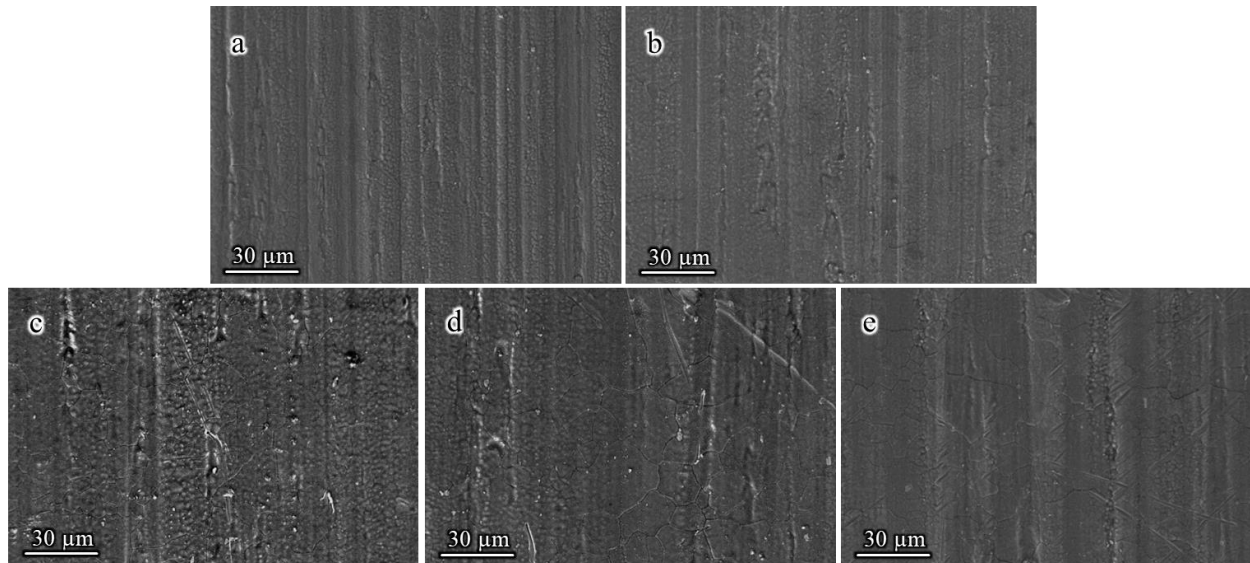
Surface morphology of extrudates produced by a 35 mm choked die using A612 material with an extrusion speed of (a) 22 mm/s, (b) 26 mm/s, (c) 30 mm/s, (d) 34 mm/s, and (e) 40 mm/s.
